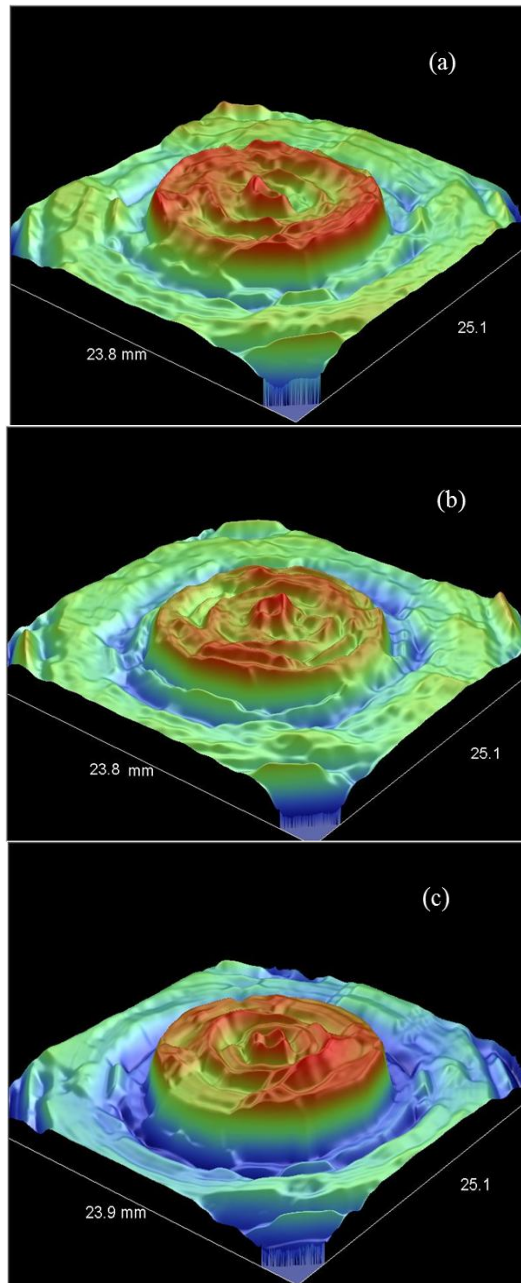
White light interferometer imaging of the complete workpiece profile (a & b) Brass (c) Aluminium
